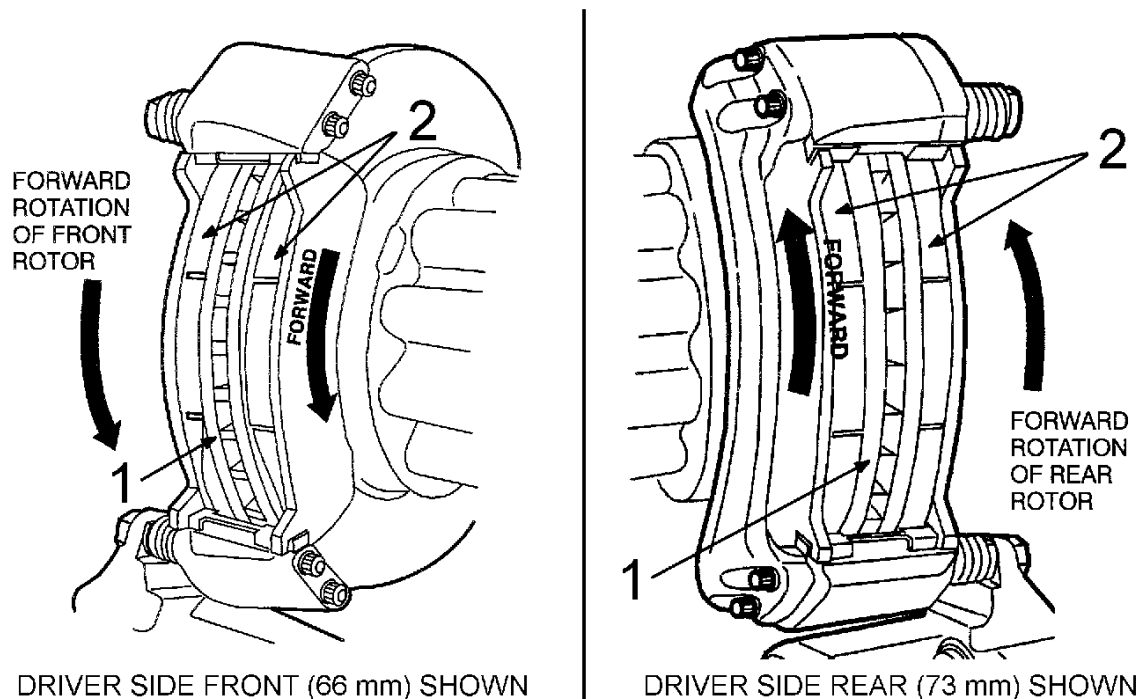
Install HX-7A1-EE Inboard and Outboard Disc Brake Pads with Arrow in Forward Rotor Rotation Direction
